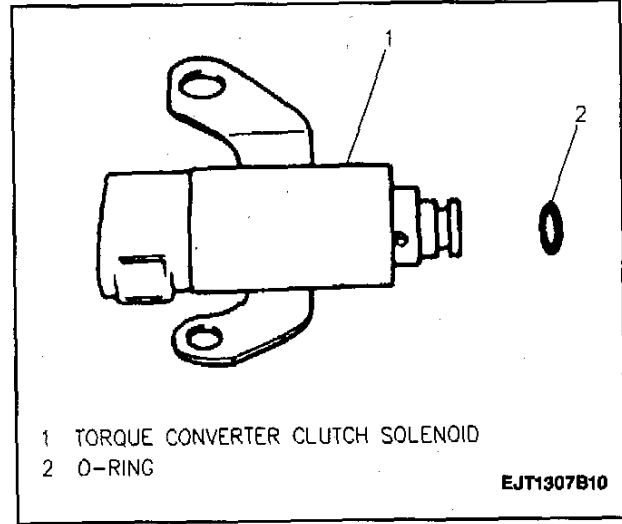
Torque Converter Clutch Solenoid (03-72LE, 4-Speed)
